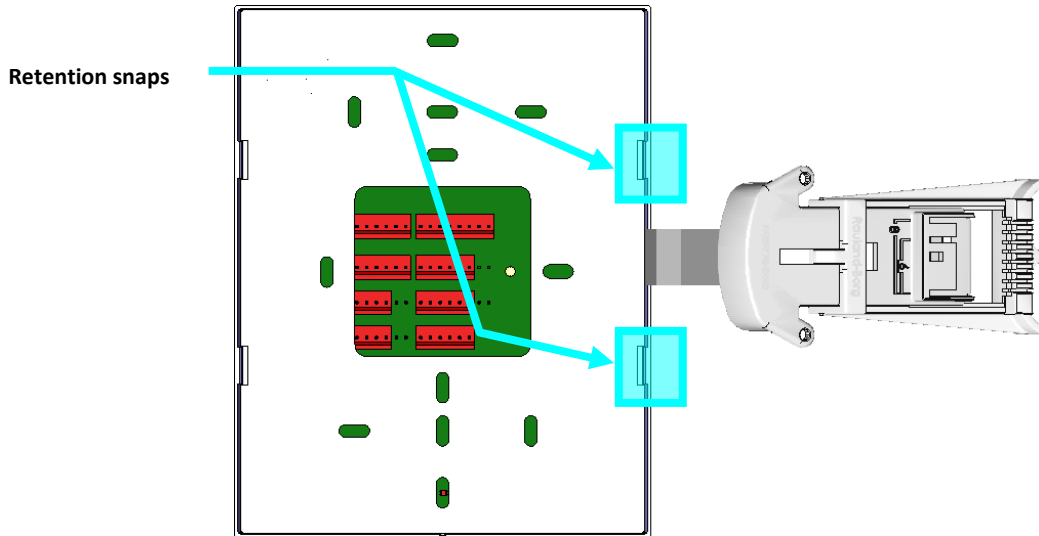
Back side view of the Corridor Light showing the Corridor Light/Station removal tool inserted between Base Plate and Corridor Light assembly.
